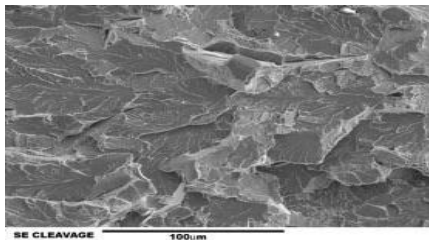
Brittle fracture of an FC-0205 powder metal control rod displaying cleavage facets. [3]
